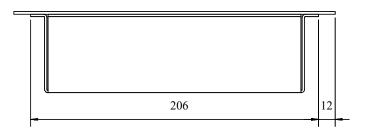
Dimensions of Full Size Connector Plate (in mm)
